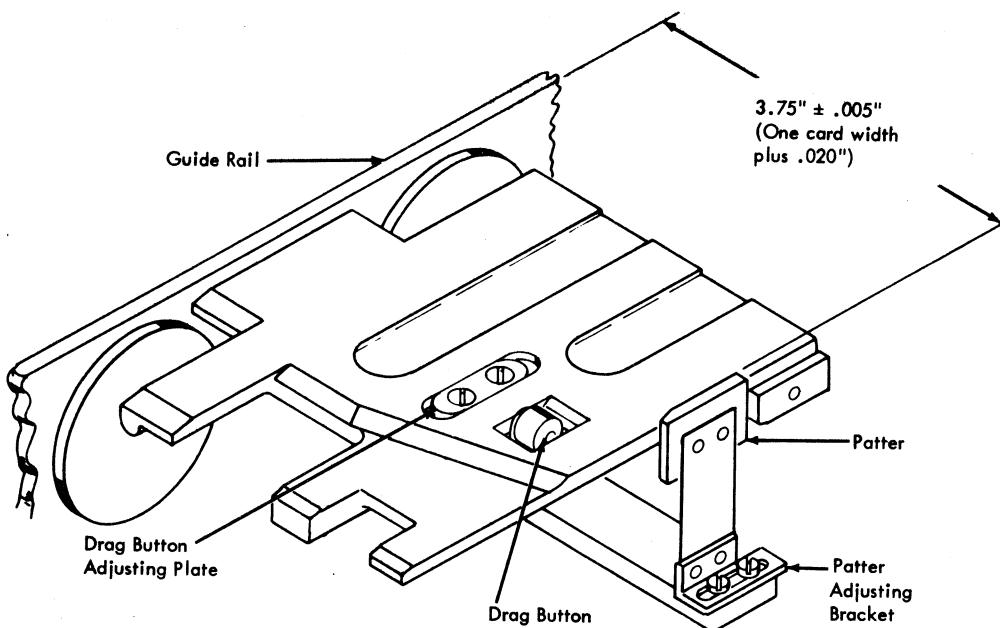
Punch Drag Button and Card Patter Adjustment
